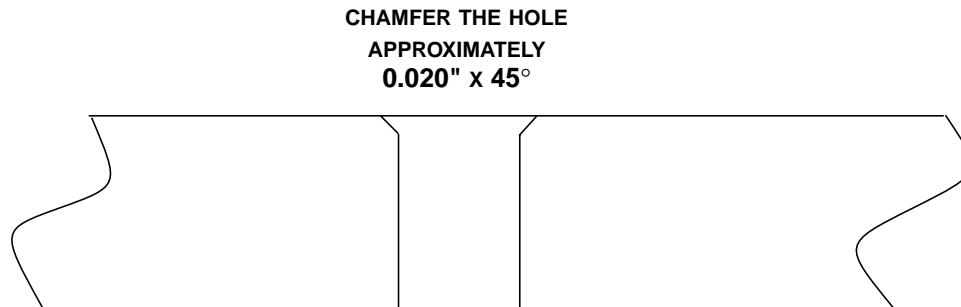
CHAMFERING OF CLOSE TOLERANCE HOLES
